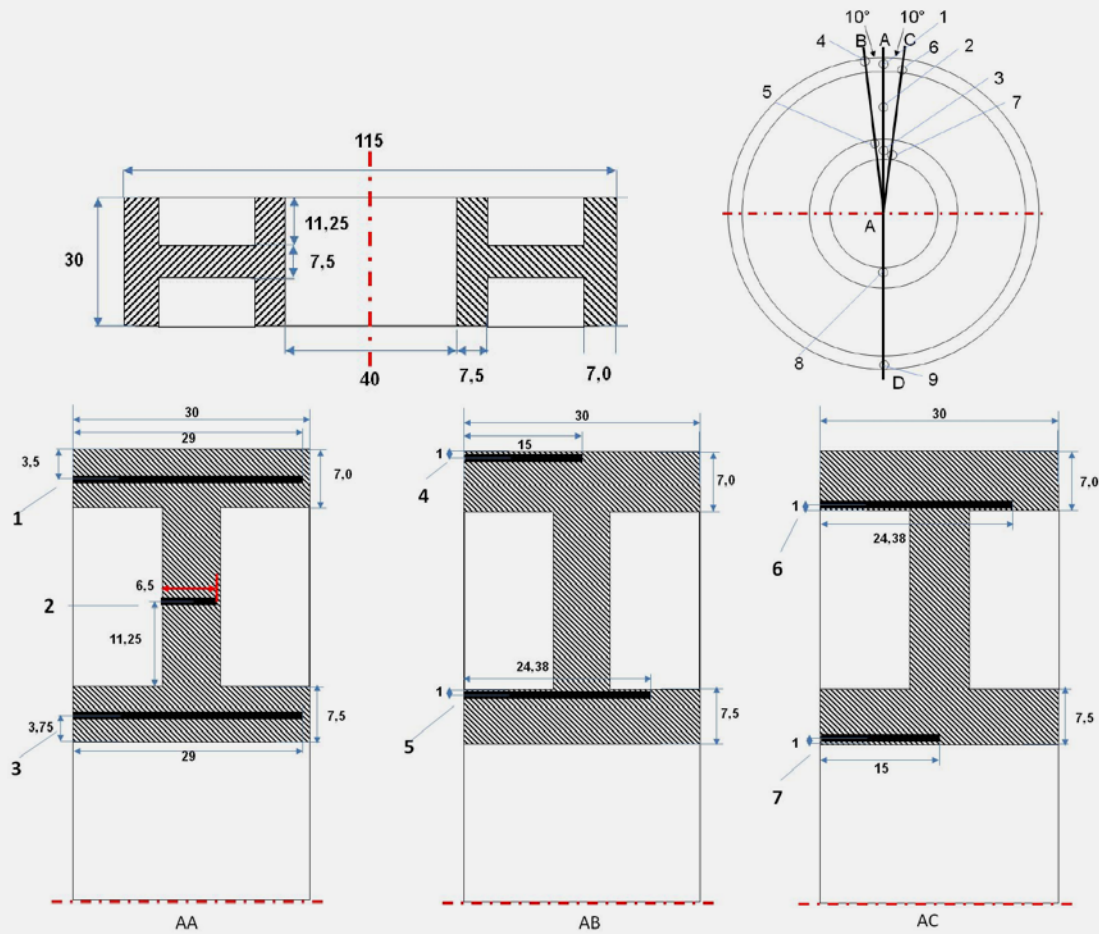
Dimensions (top left) and schematic of thermocouple drilling for geometry type A and size category passenger car
